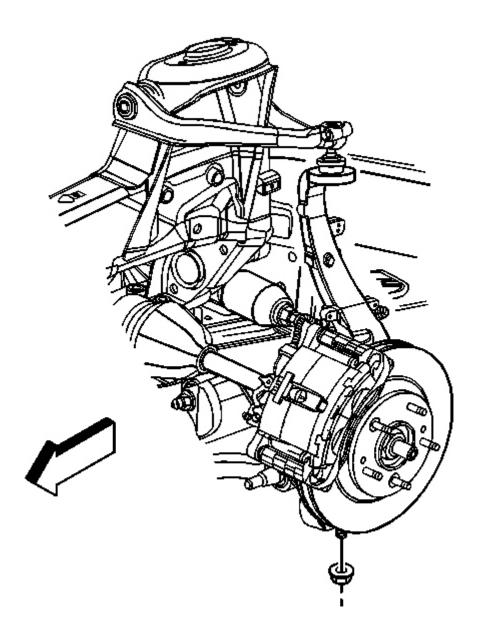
Removing/Installing Lower Ball Joint Retaining Nut Courtesy of GENERAL MOTORS CORP.
